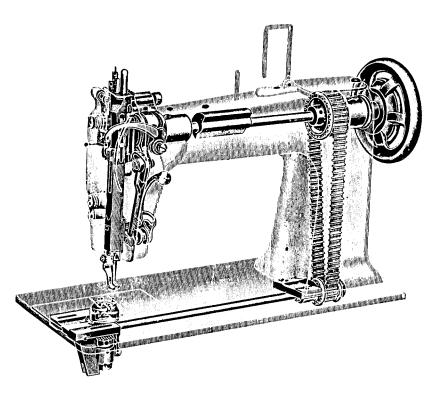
Machine No. 121 w 1. Phantom view showing interior placement of the working parts in a finished machine
